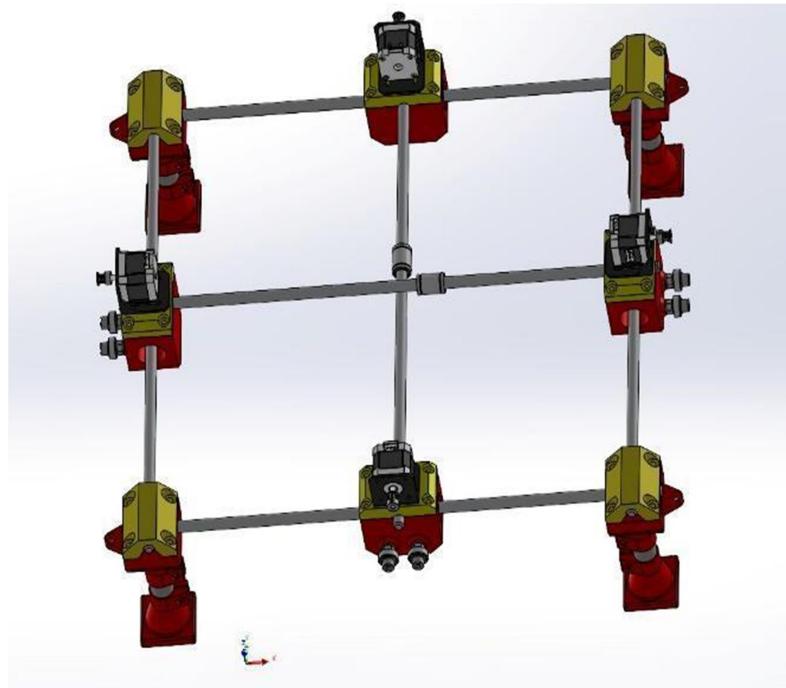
CAD Design of the Prototype of 2D Movement Mechanism
